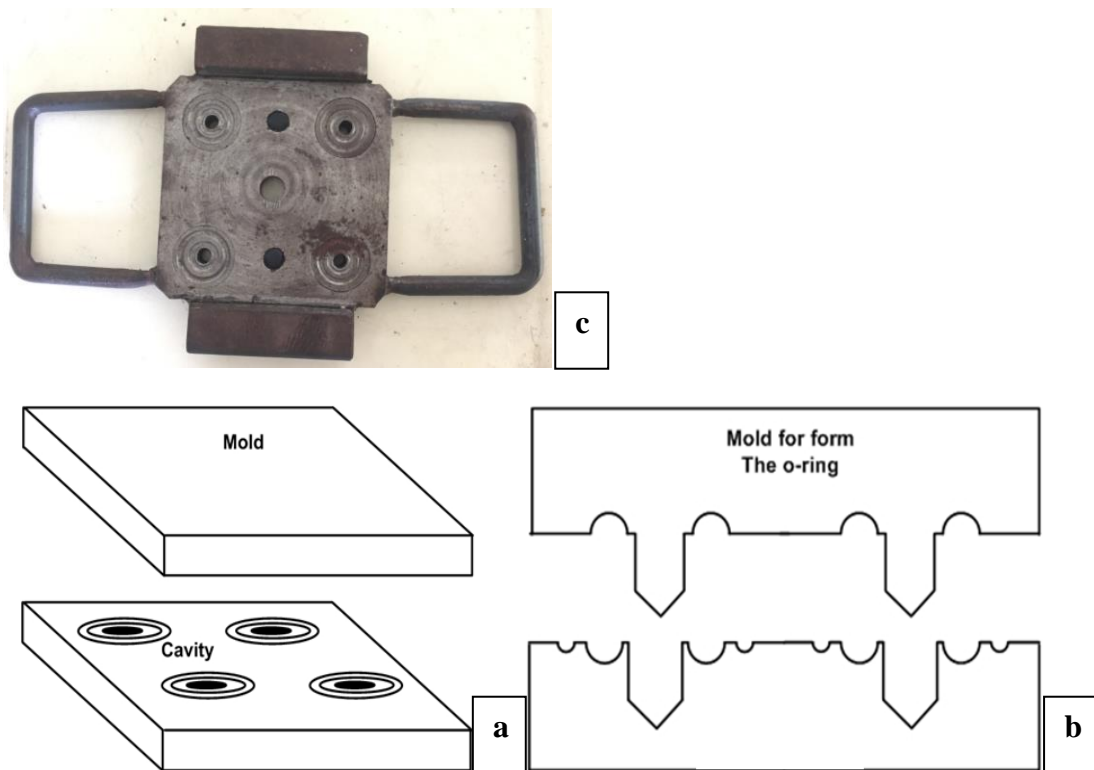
(a) Top view of mold housing, (b) Cross-section view of Mold housing, (c) O-rings mold with four housing.
